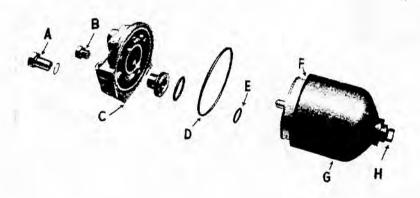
EXPLODED VIEW OF C.A.V. FUEL FILTER
